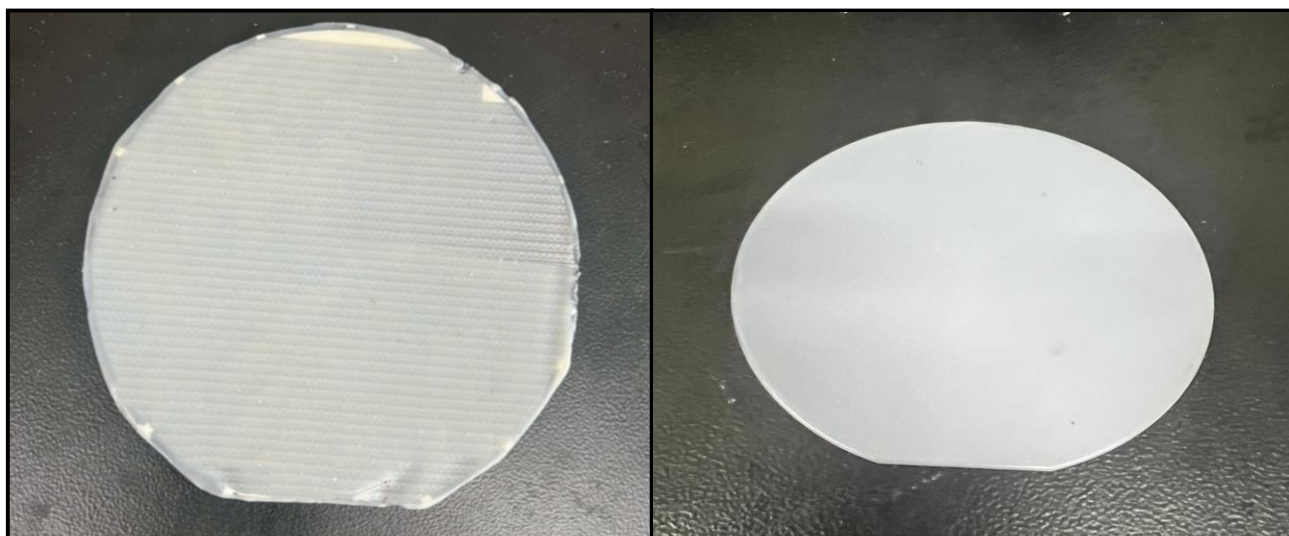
Surface photographs of 6-inch and 4-inch wafers molded with EBD-C10-E LMC, showing uniform replication and a defect-free appearance after compression molding.
